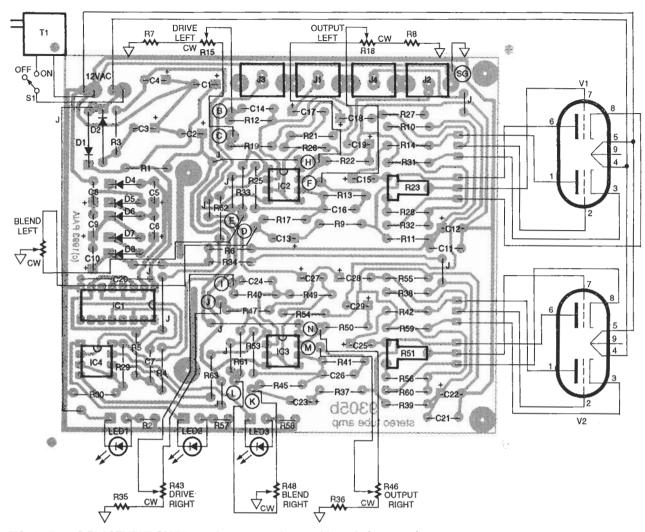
PARTS-PLACEMENT DIAGRAM. Any accepted assembly technique can be used for the TubeHead, but a PC board is recommended.
